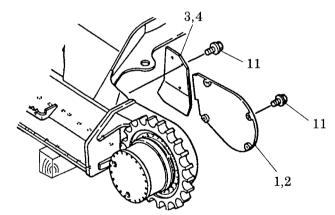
Removing and installing cover (1), (2), (3), (4)
